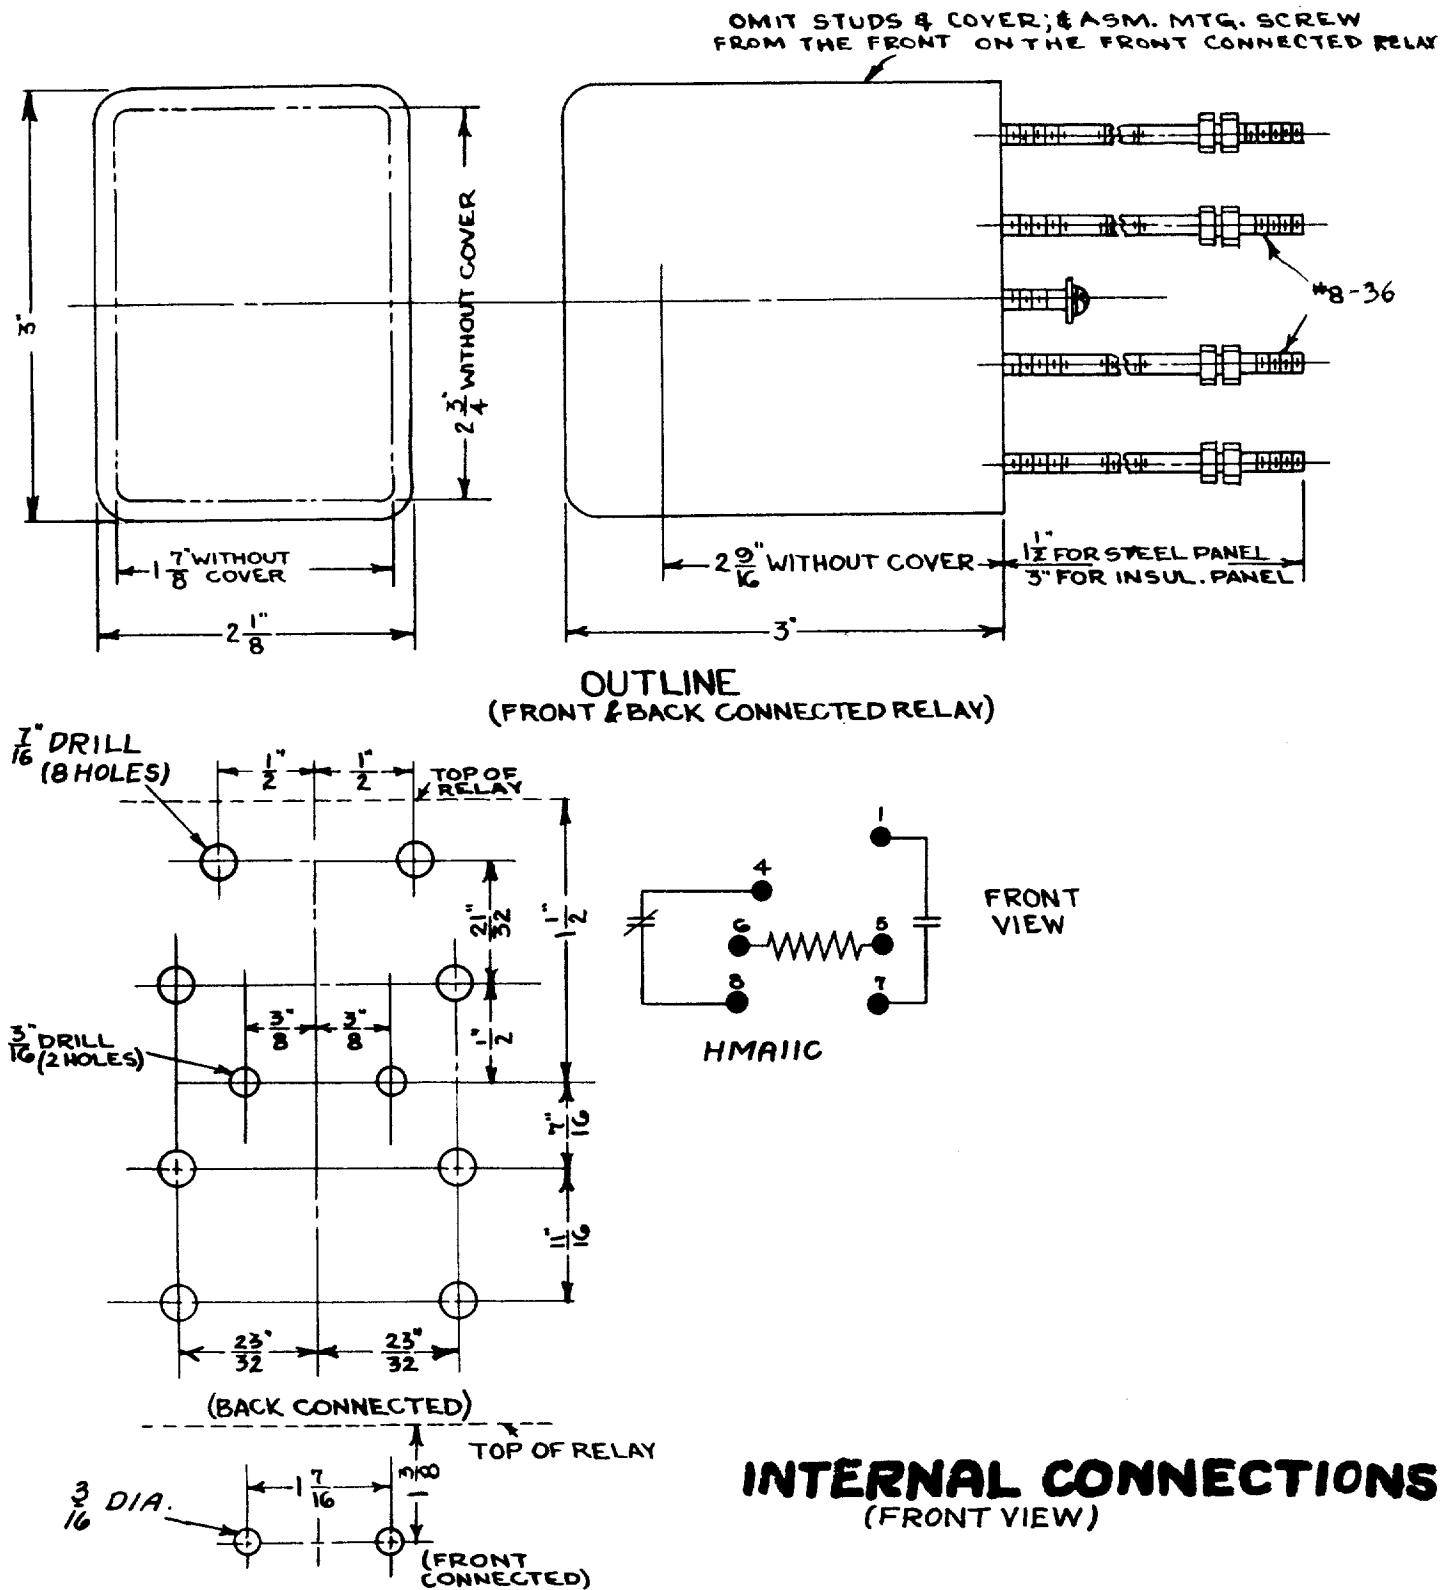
(K-6400440 [5]) OUTLINE, PANEL DRILLING DIMENSIONS AND INTERNAL CONNECTIONS FOR TYPE HMA11C AND HMA11D RELAY
